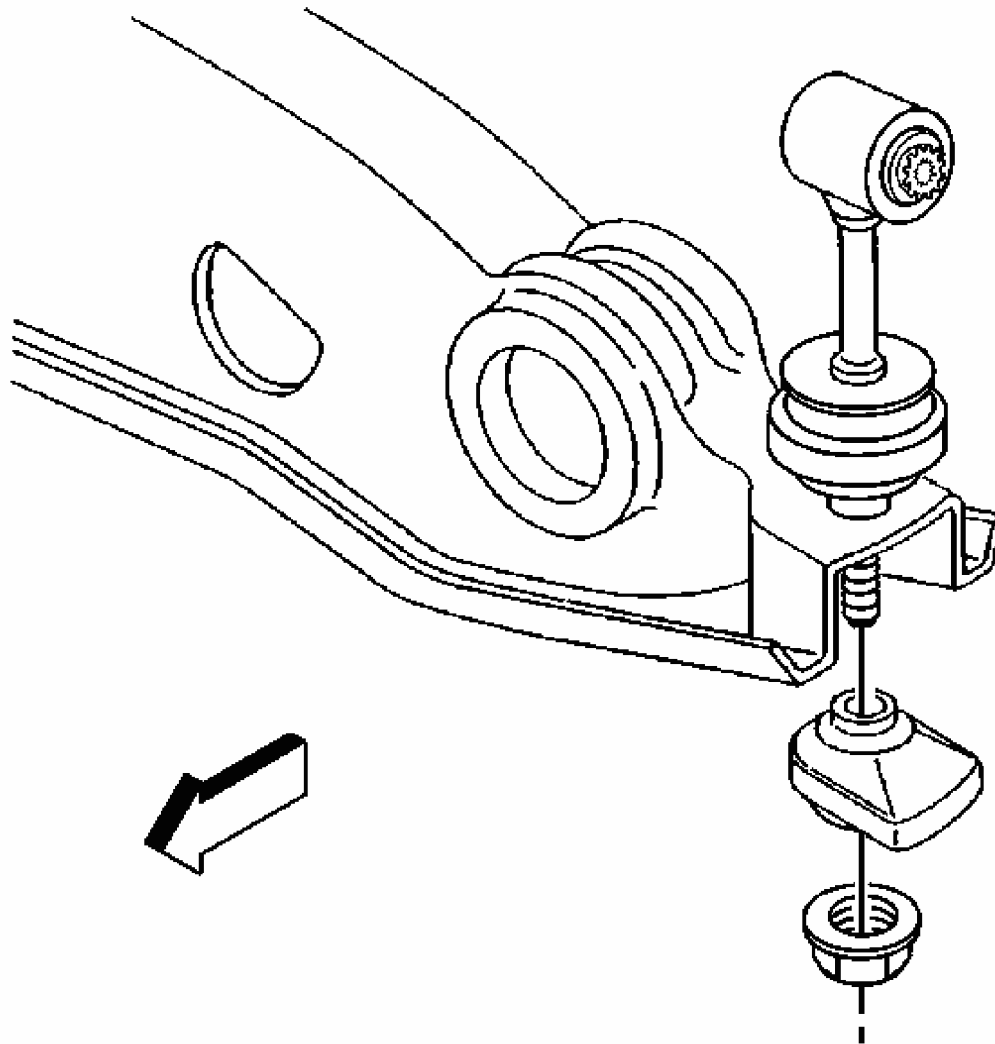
Torsion Bar Links Lower Retaining Nuts
